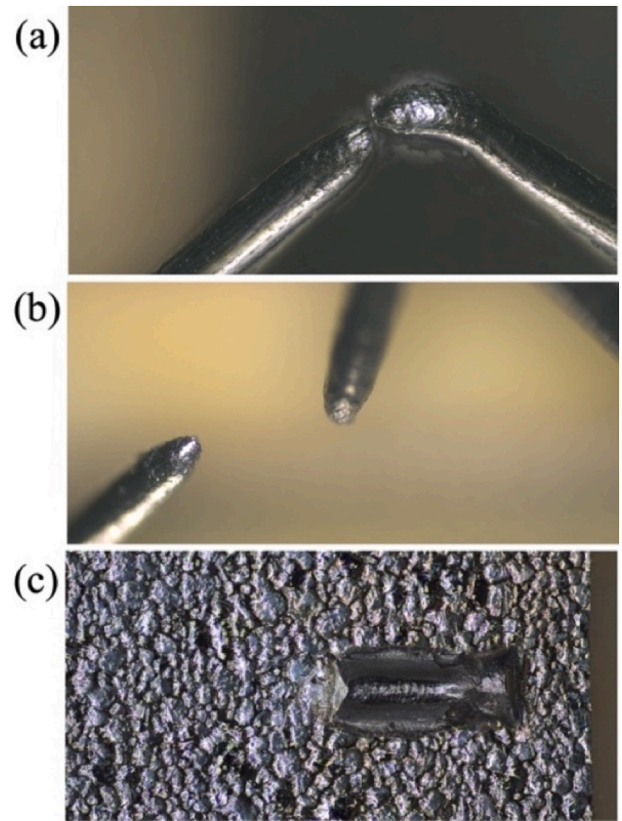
Failure mode of shear strength test (a) knee fracture (b) leg fracture (c) heel fracture.
